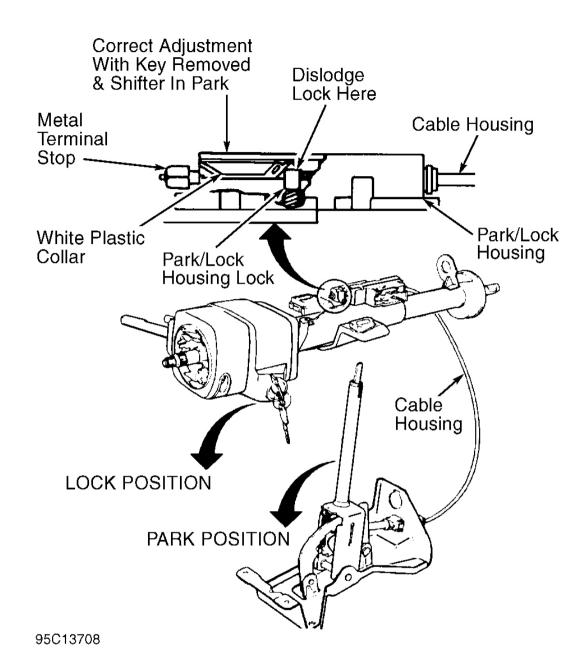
Adjusting Park Lock Cable ("F" & "N" Bodies - Floor Shift)
